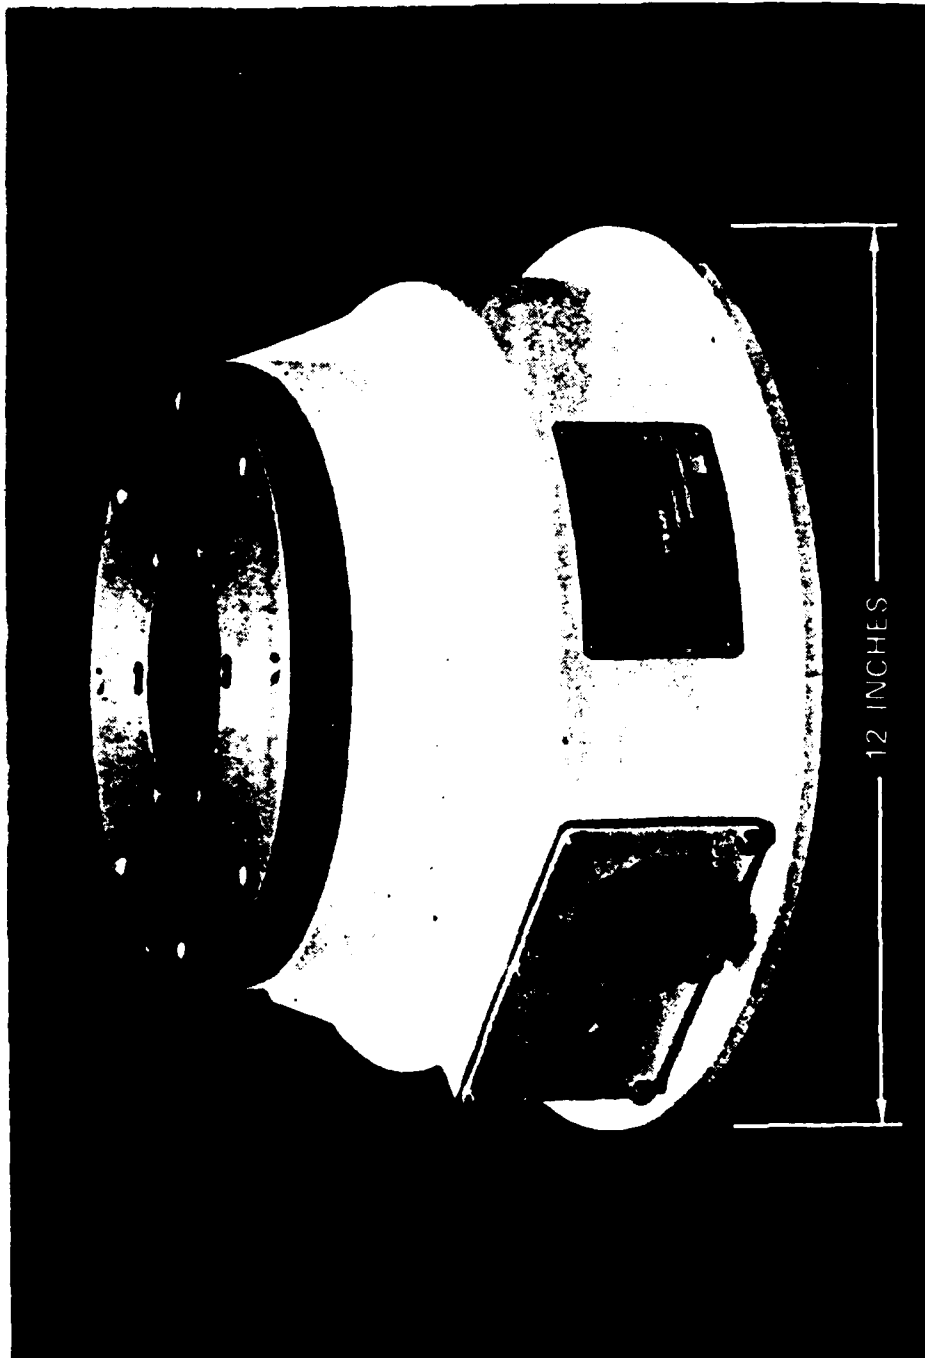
ROTATOR PEDESTAL ASSEMBLY
